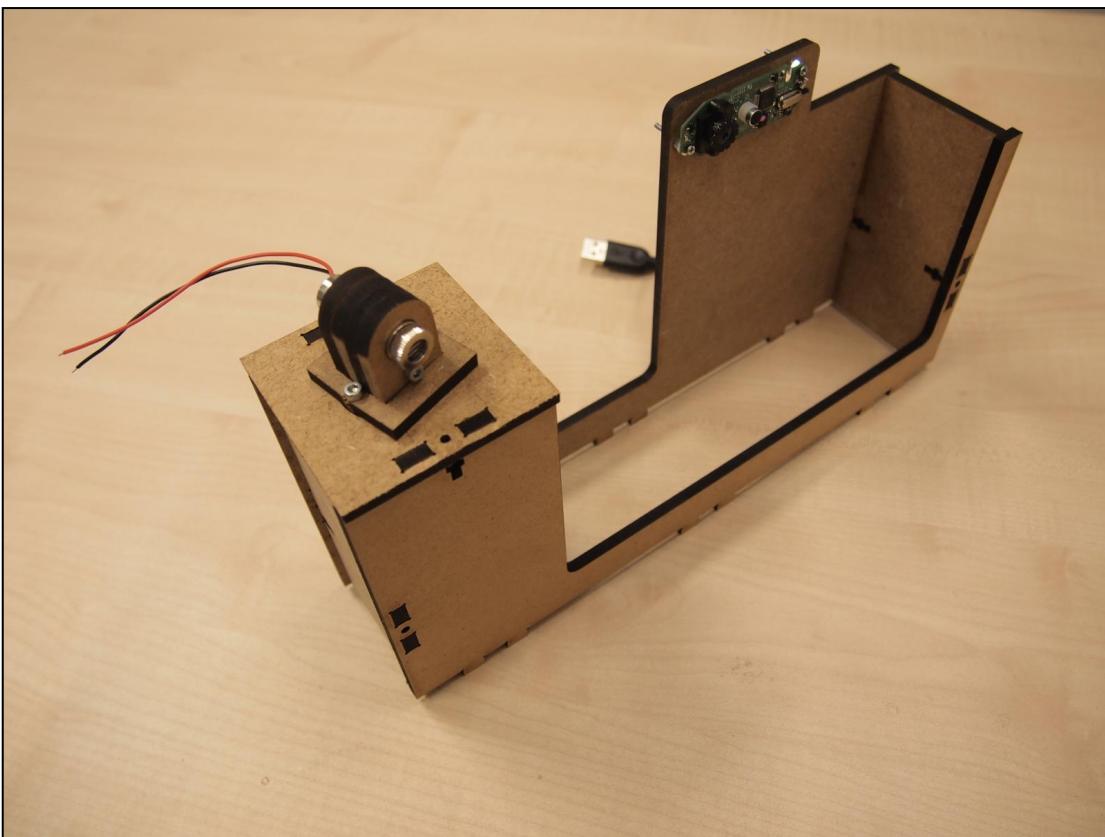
and assemble them as shown. Use six DIN 912 M3x16 screws and nuts to secure the bracket.
